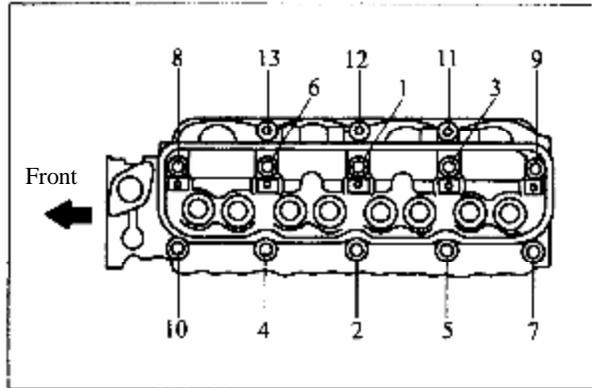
Tightening Sequence of Cylinder Head Bolts
